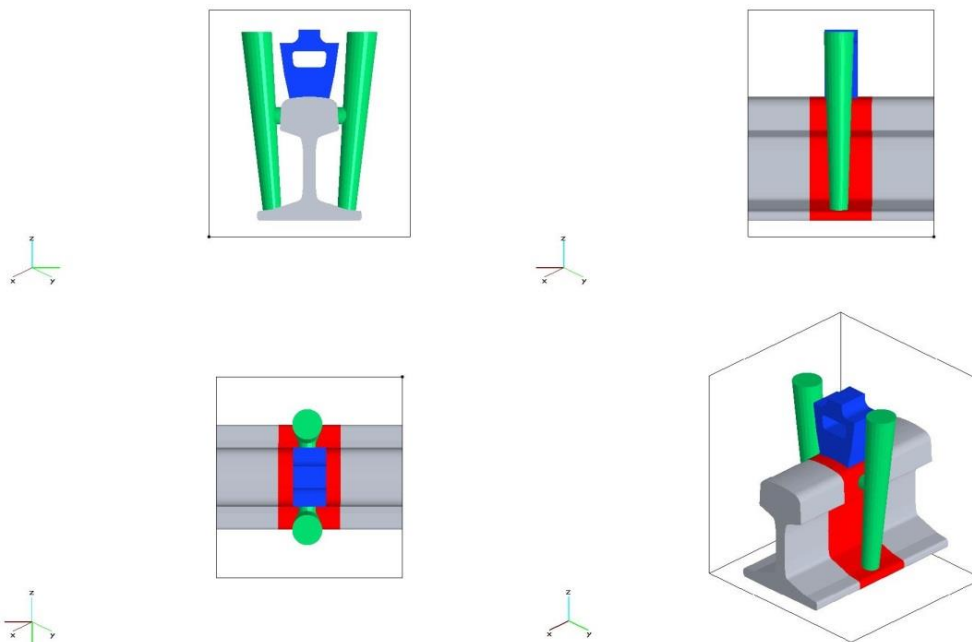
Metal casting without the sand mould, from the front, side, top, and angle perspective
